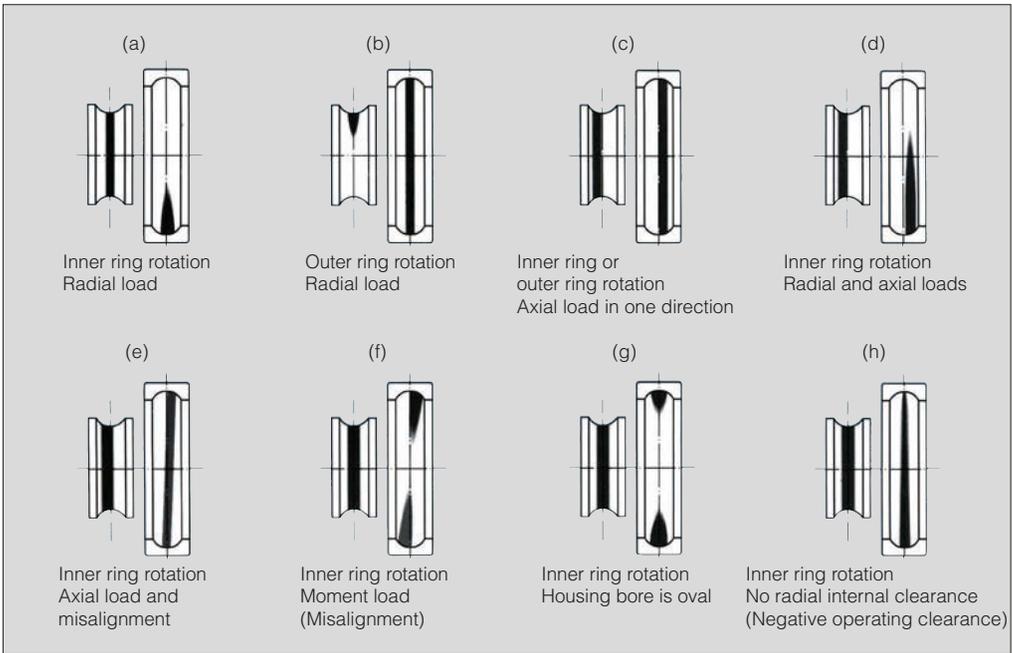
Typical Running Traces of Deep Groove Ball Bearings
